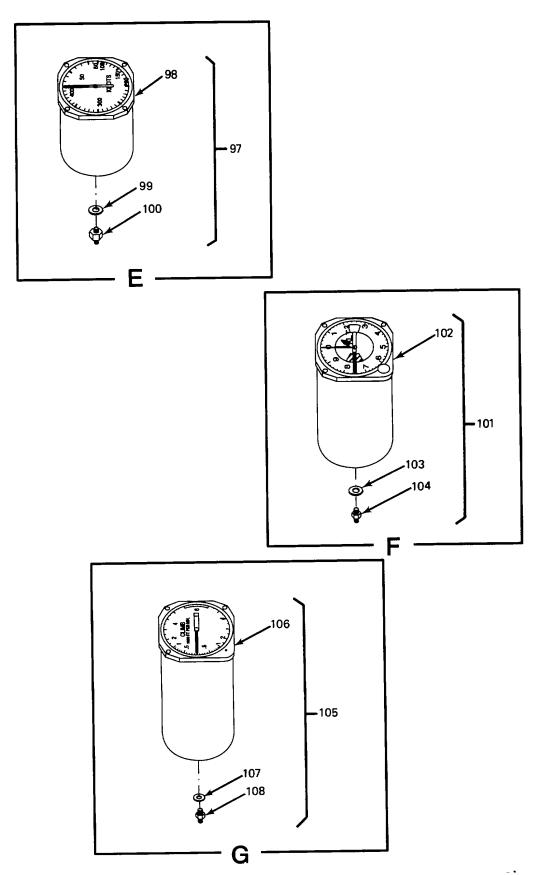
CHASSIS ASSEMBLY (90-50025) (SHEET 8 OF 8)
